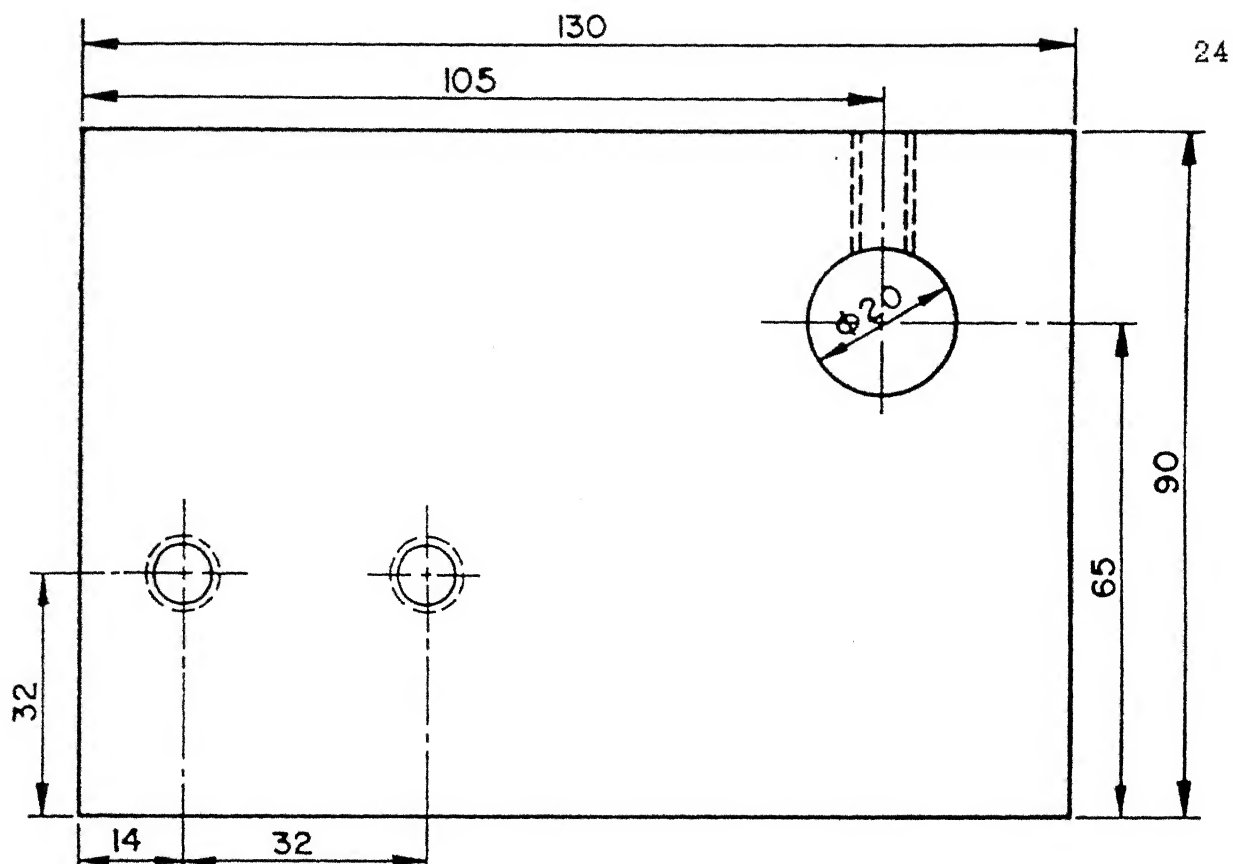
Iosipescu shear test fixture bearing mounting assembly
